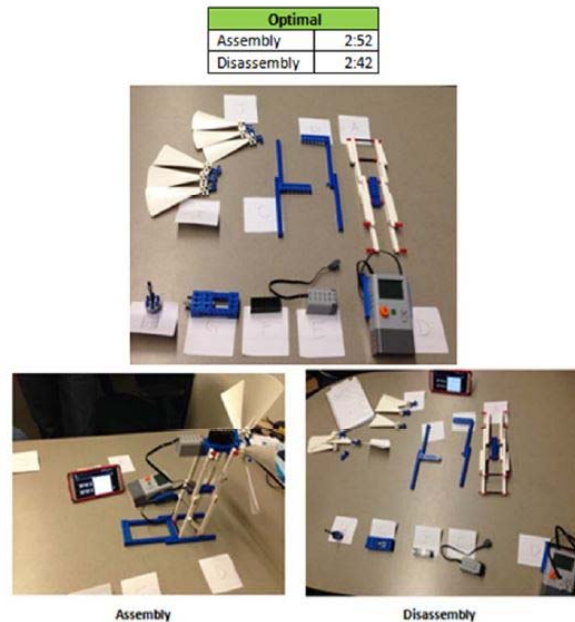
LEGO® Wind Turbine Assembly and Disassembly Process for Optimal Solution
